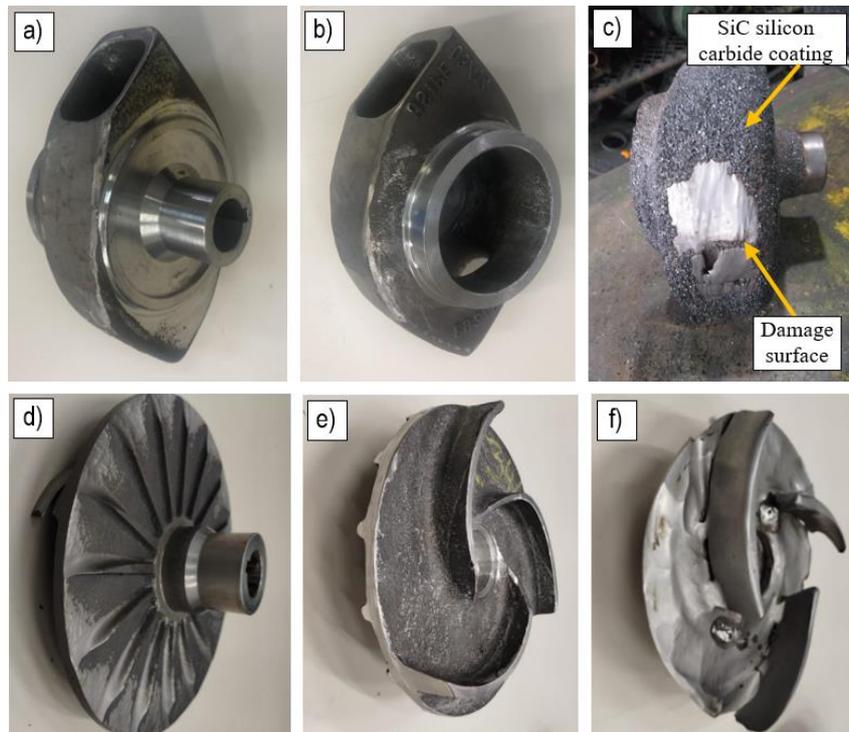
View of pump rotors from various angles: a) slurry rotor shaft side, b) flow inlet side of slurry pump rotor, c) worn and damaged slurry pump rotor, d) side of the tailings rotor shaft, e) flow inlet side of the tailings rotor, and f) tailings rotor with welded and worn blades.
